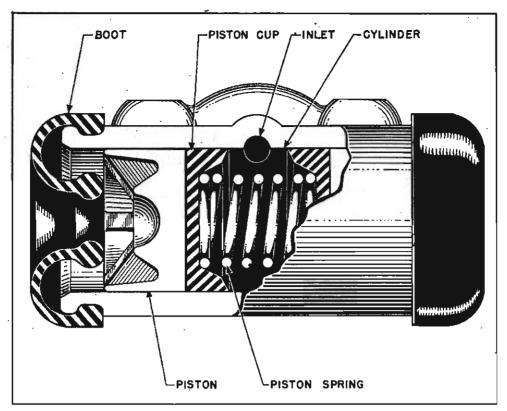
The Wheel Cylinders Are of the Straight Bore Double Piston Type.
